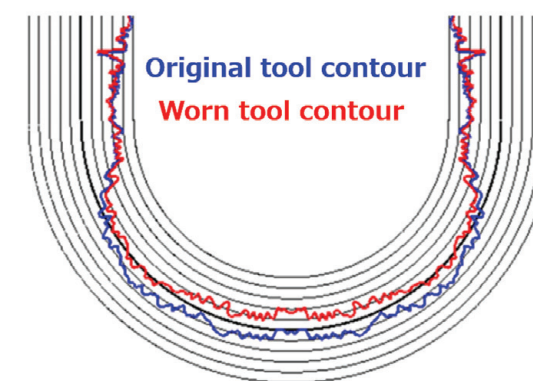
VIEW OF FORMEYE MEASUREMENT
